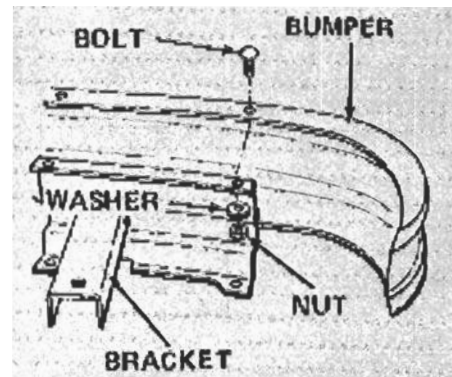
Bracket being removed or installed on (a) bumper of 1973 or 1974 vehicle.
